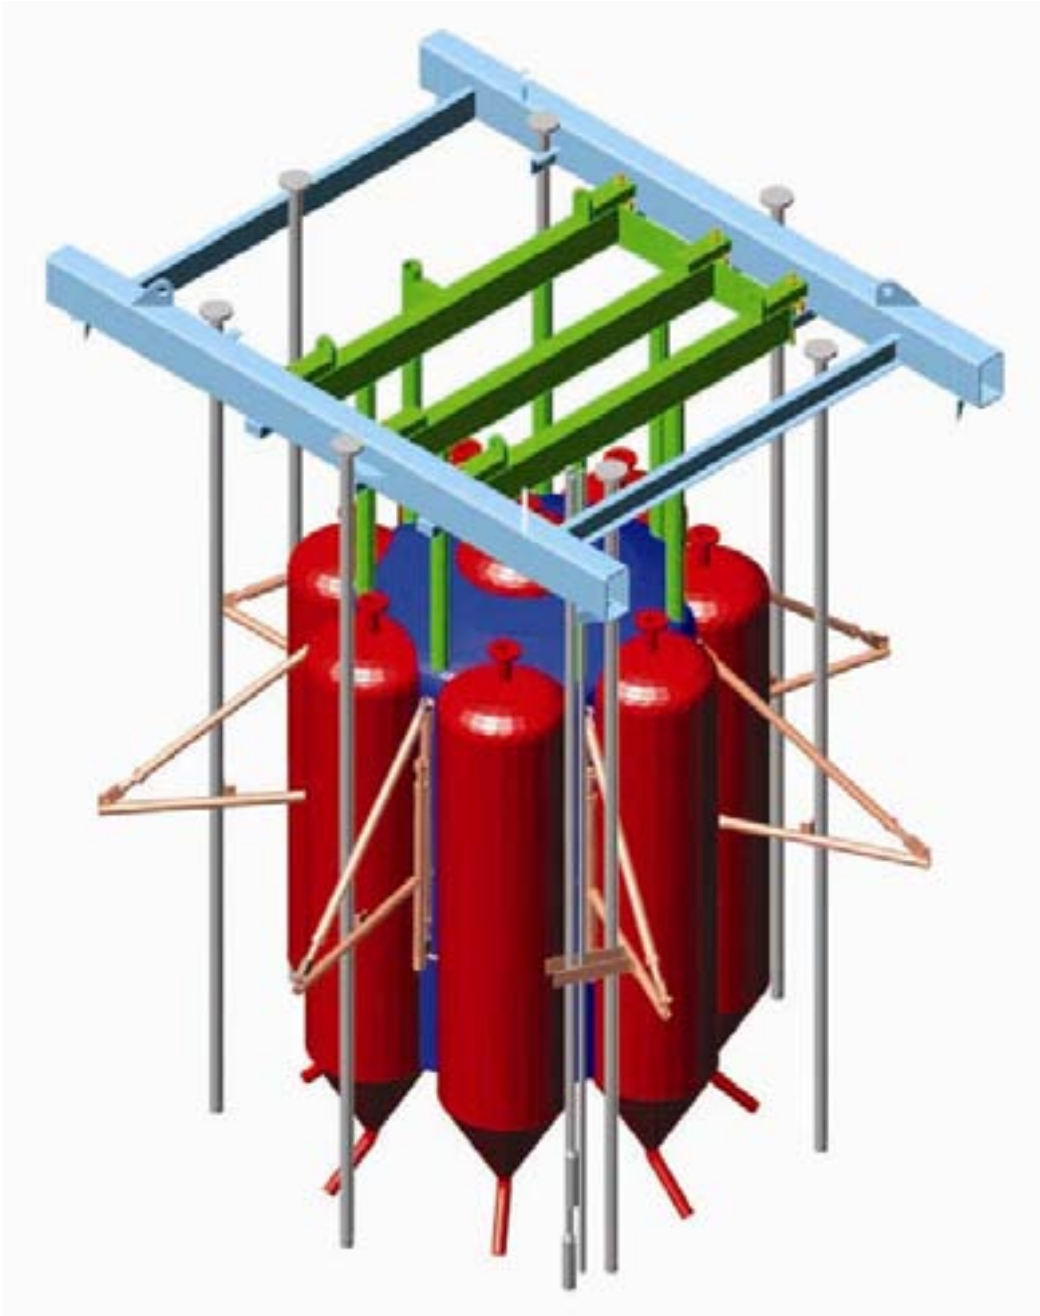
Schematic of the Elevation View of the PJM/Sparger Cluster Assembly
